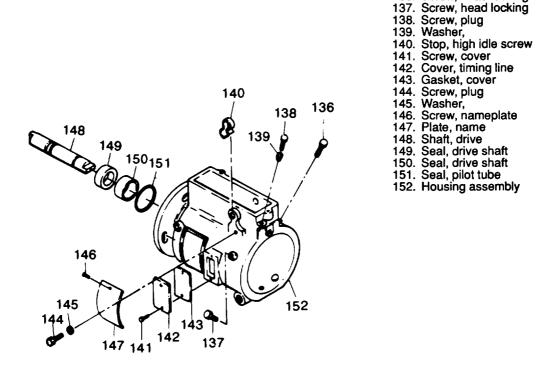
Fuel Injection Pump, Exploded View (Sheet 7 of 7)
